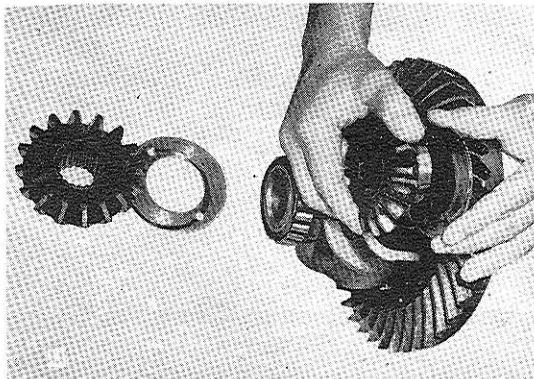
Assembling Side V5096 Gear & Thrust Washer
